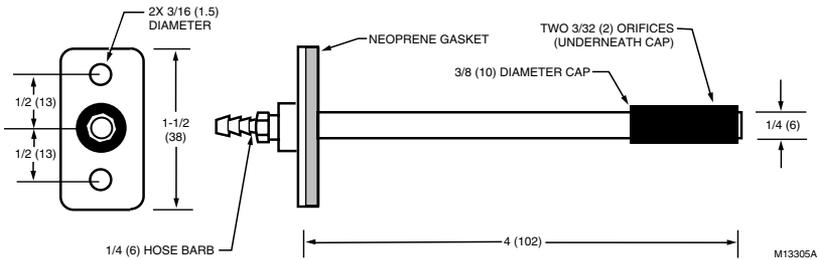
32003169-001 Static Pressure Probe dimensions in in. (mm).
